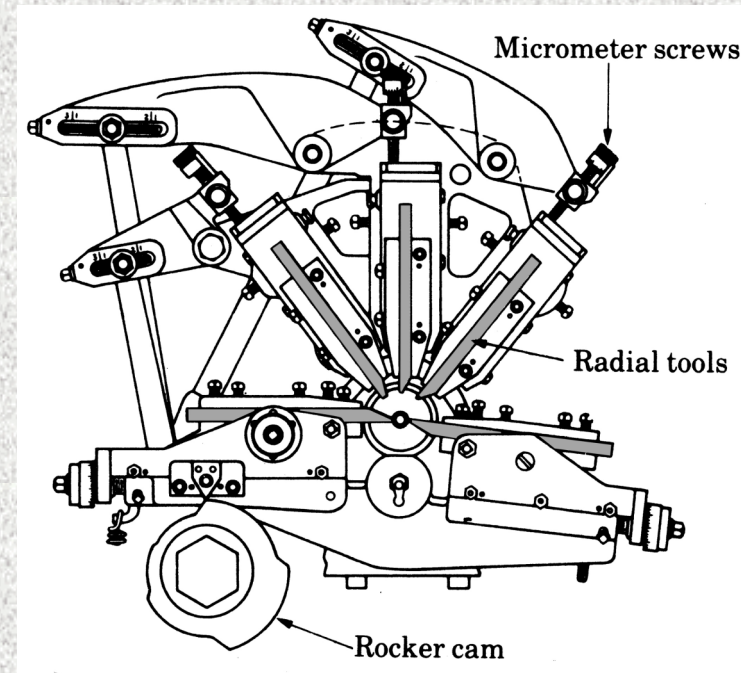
Schematic illustration of a Swiss-type automatic screw machine.
